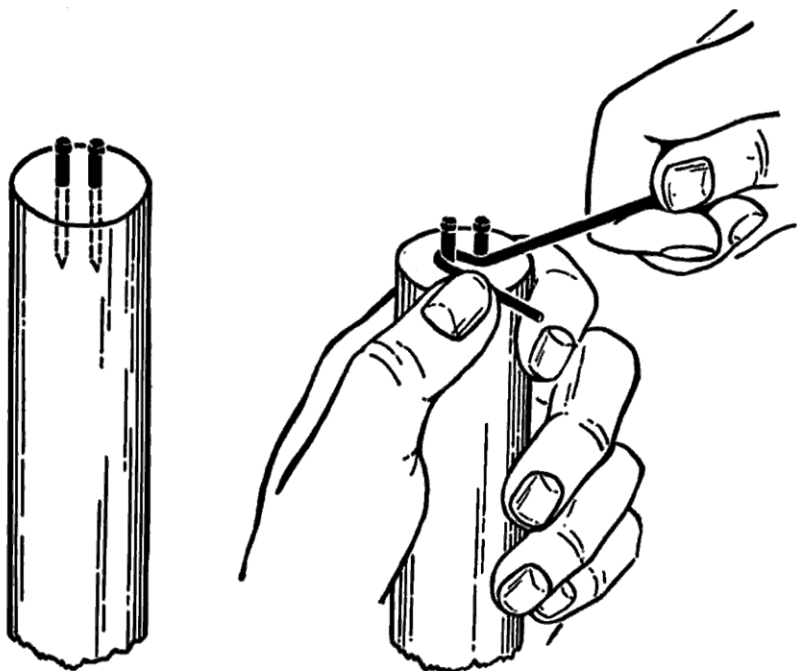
shows a simple wire bender. It consists of a short length of 1" dowel, or piece of broomhandle, into the end of which two small brads have been driven. The heads of the brads keep the wire in place. The illustration shows how the bender is used. Several of these benders can be made, each with nails of different diameters for bends of different sizes. The handle is 6" or 8" long.
